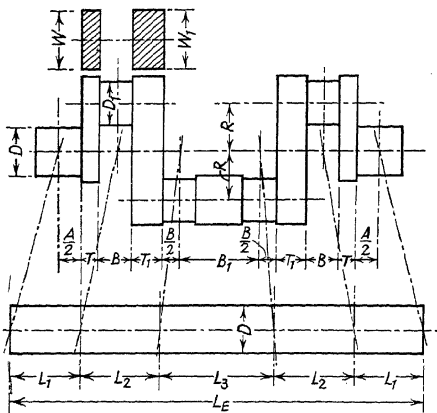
Two-bearing, four-cylinder, four-S.C., S.A. engine crankshaft.
